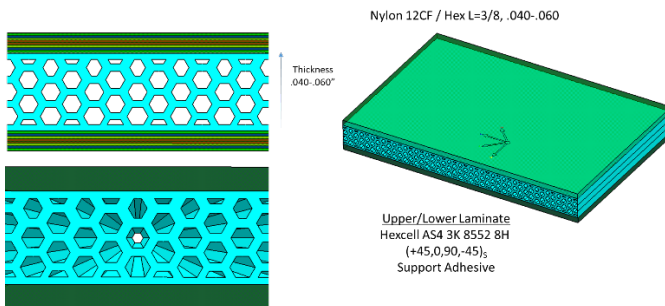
Armor Test Coupon 3. *NCH and NCHP samples, nylon 12 composite with horizontal cell wall. NCHP has progressively thicker cell walls.
